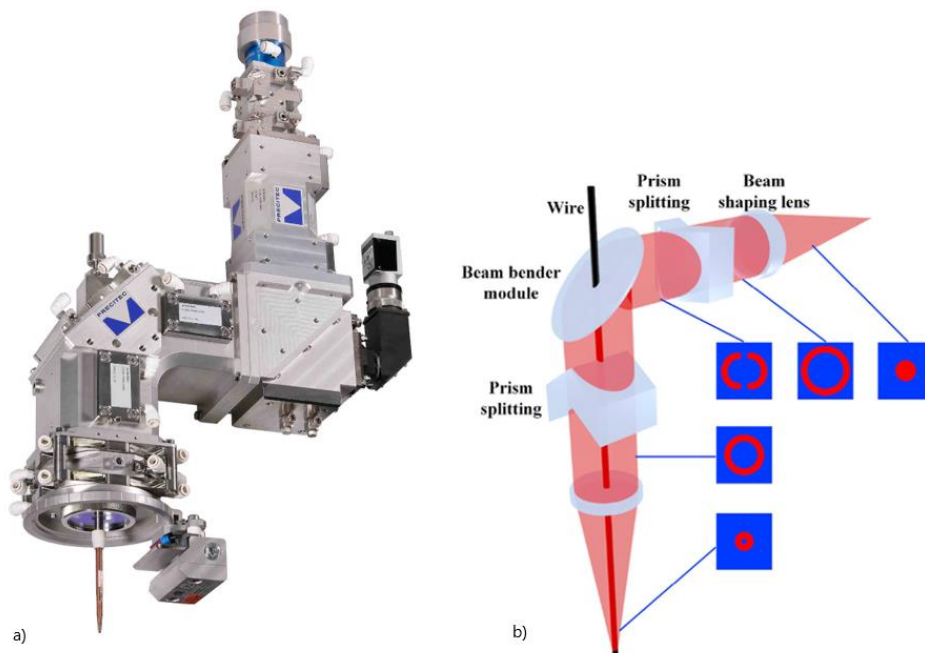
a) Coaxprinter deposition head, b) Schematic of the beam handling optics of CoaxPrinter [40], [41]
